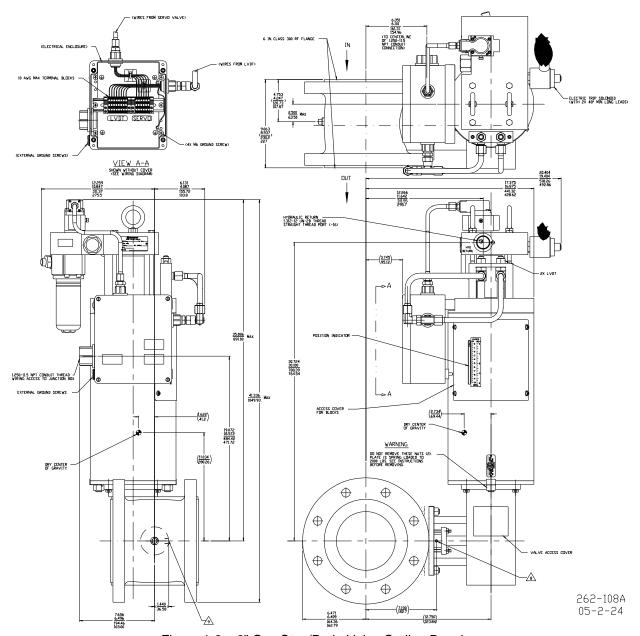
6" Gas Stop/Ratio Valve Outline Drawing
